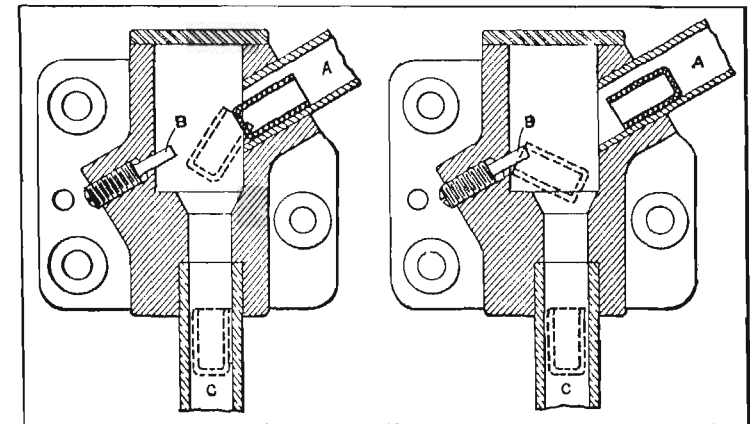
Simple Attachment of an Automatic Feeding Mechanism for Turning Shells Which Enter Open End Foremost
